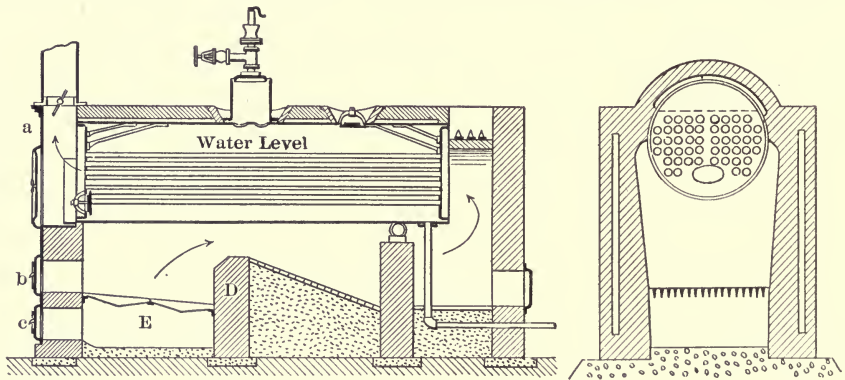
Longitudinal and transverse sections of a horizontal return tubular boiler and setting.
